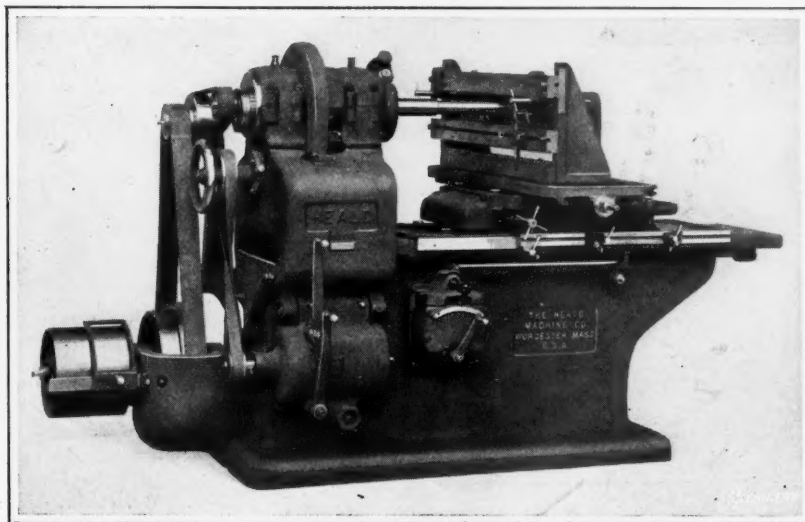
Style No. 50 Cylinder Grinding Machine made by the Heald Machine Co.
